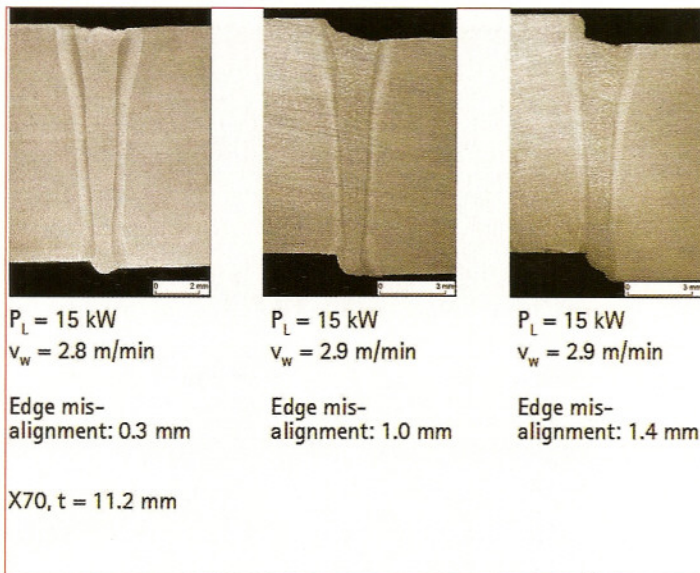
Pipeline steel X70, sheet thickness 11.2 mm, welding position PA, beam power 15 kW, welding speed 2.8 m/min. (Photo courtesy of BLAS GmbH.)
